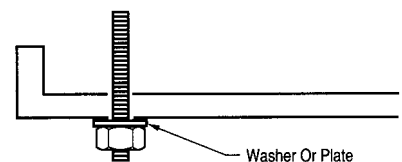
Correct placement of washer or steel plate and nut between threaded rod and unit. This helps prevent air leakage.
